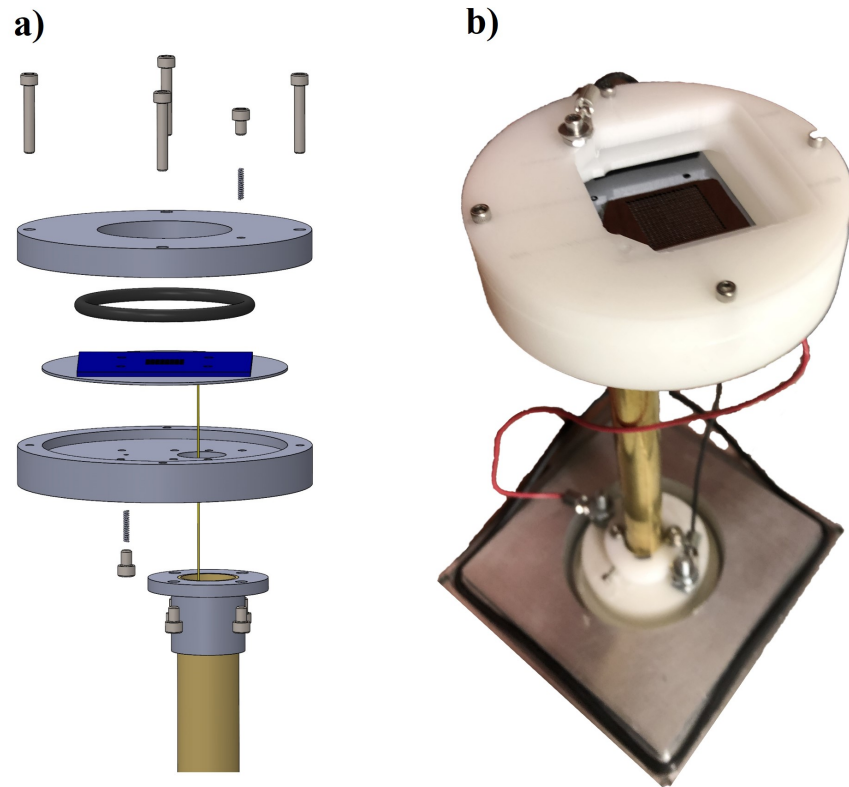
a) Schematic exploded view of the assembly b) 256 emitter array assembled with the vacuum flange.
